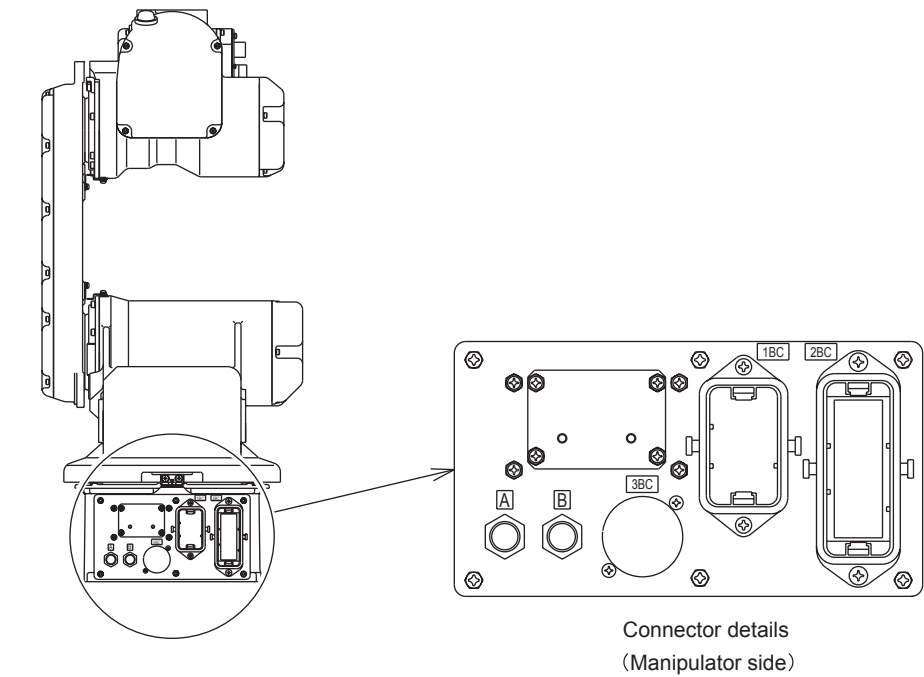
(a) Details of the Manipulator Cable Connectors (Manipulator Side)
